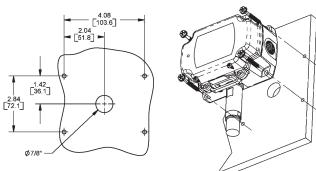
BAPI's WP enclosure and mounting hole dimensions.
